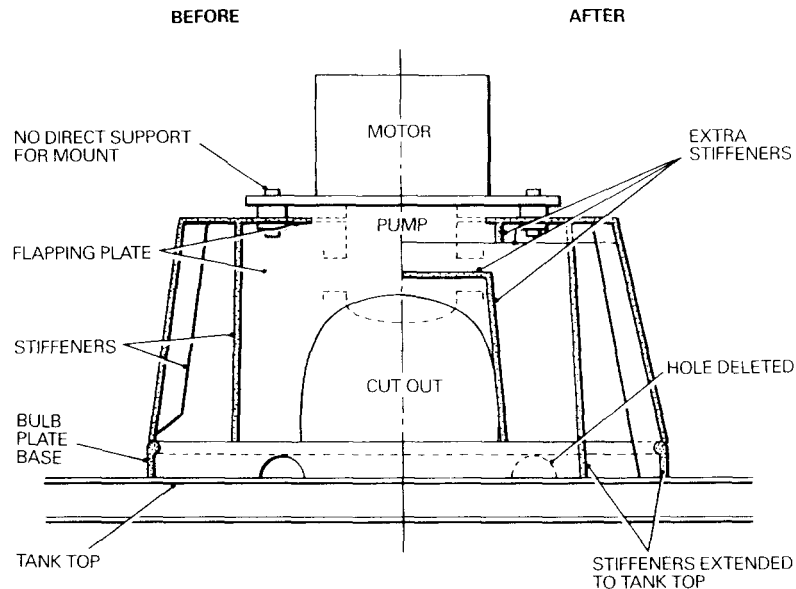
AN IDEA FOR AN IMPROVED AUXILIARY MACHINERY SEATING
